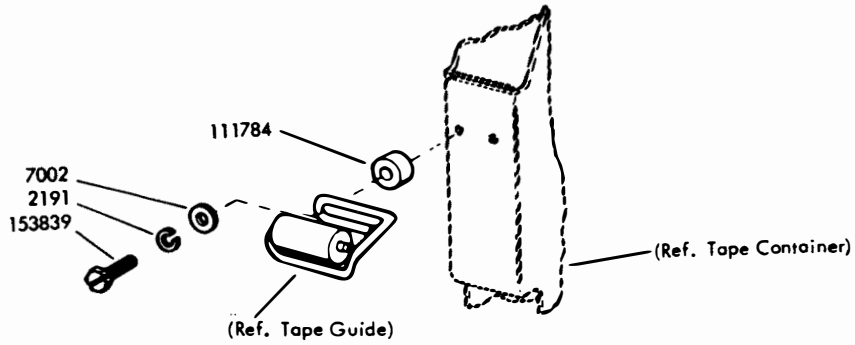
Tape Guide Mounting Components - Used on Low-Level Sets
